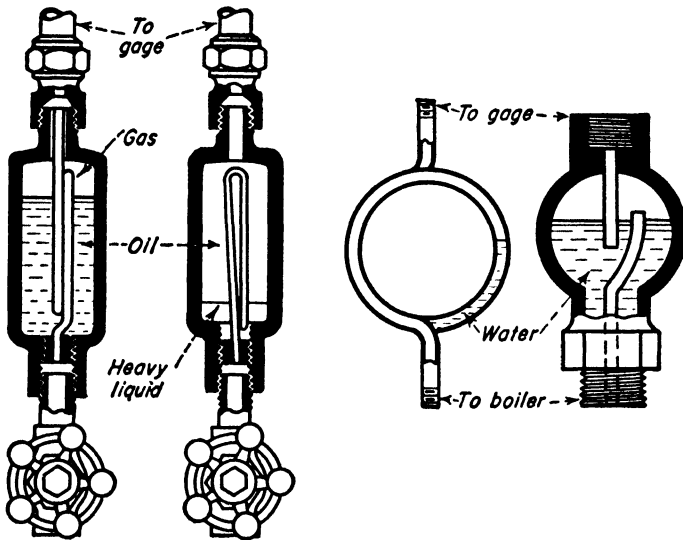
Liquid sealing chambers filled with a suitable fluid keep corrosive or hot substances out of the pressure gage. Be careful when mounting to see that they retain the filling agent.
